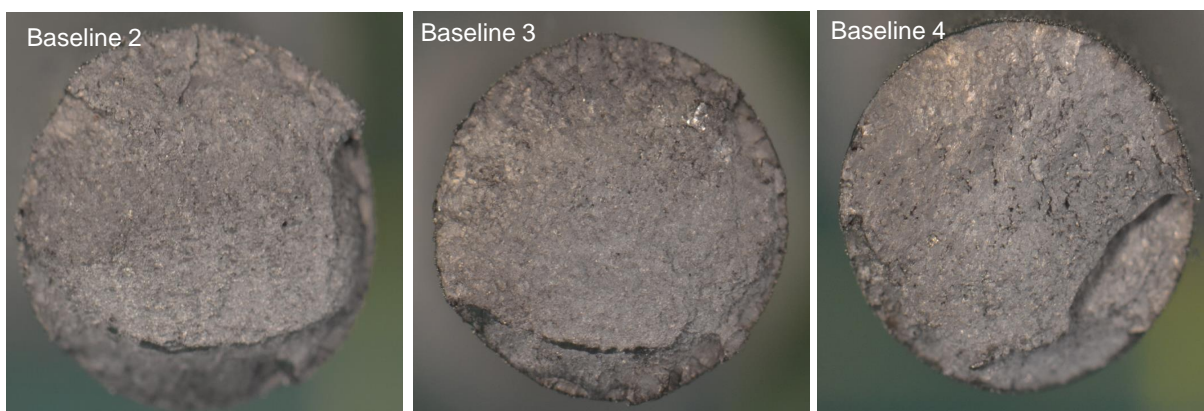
Fracture Surface Photographs baseline fatigue specimens analyzed for fracture surface
